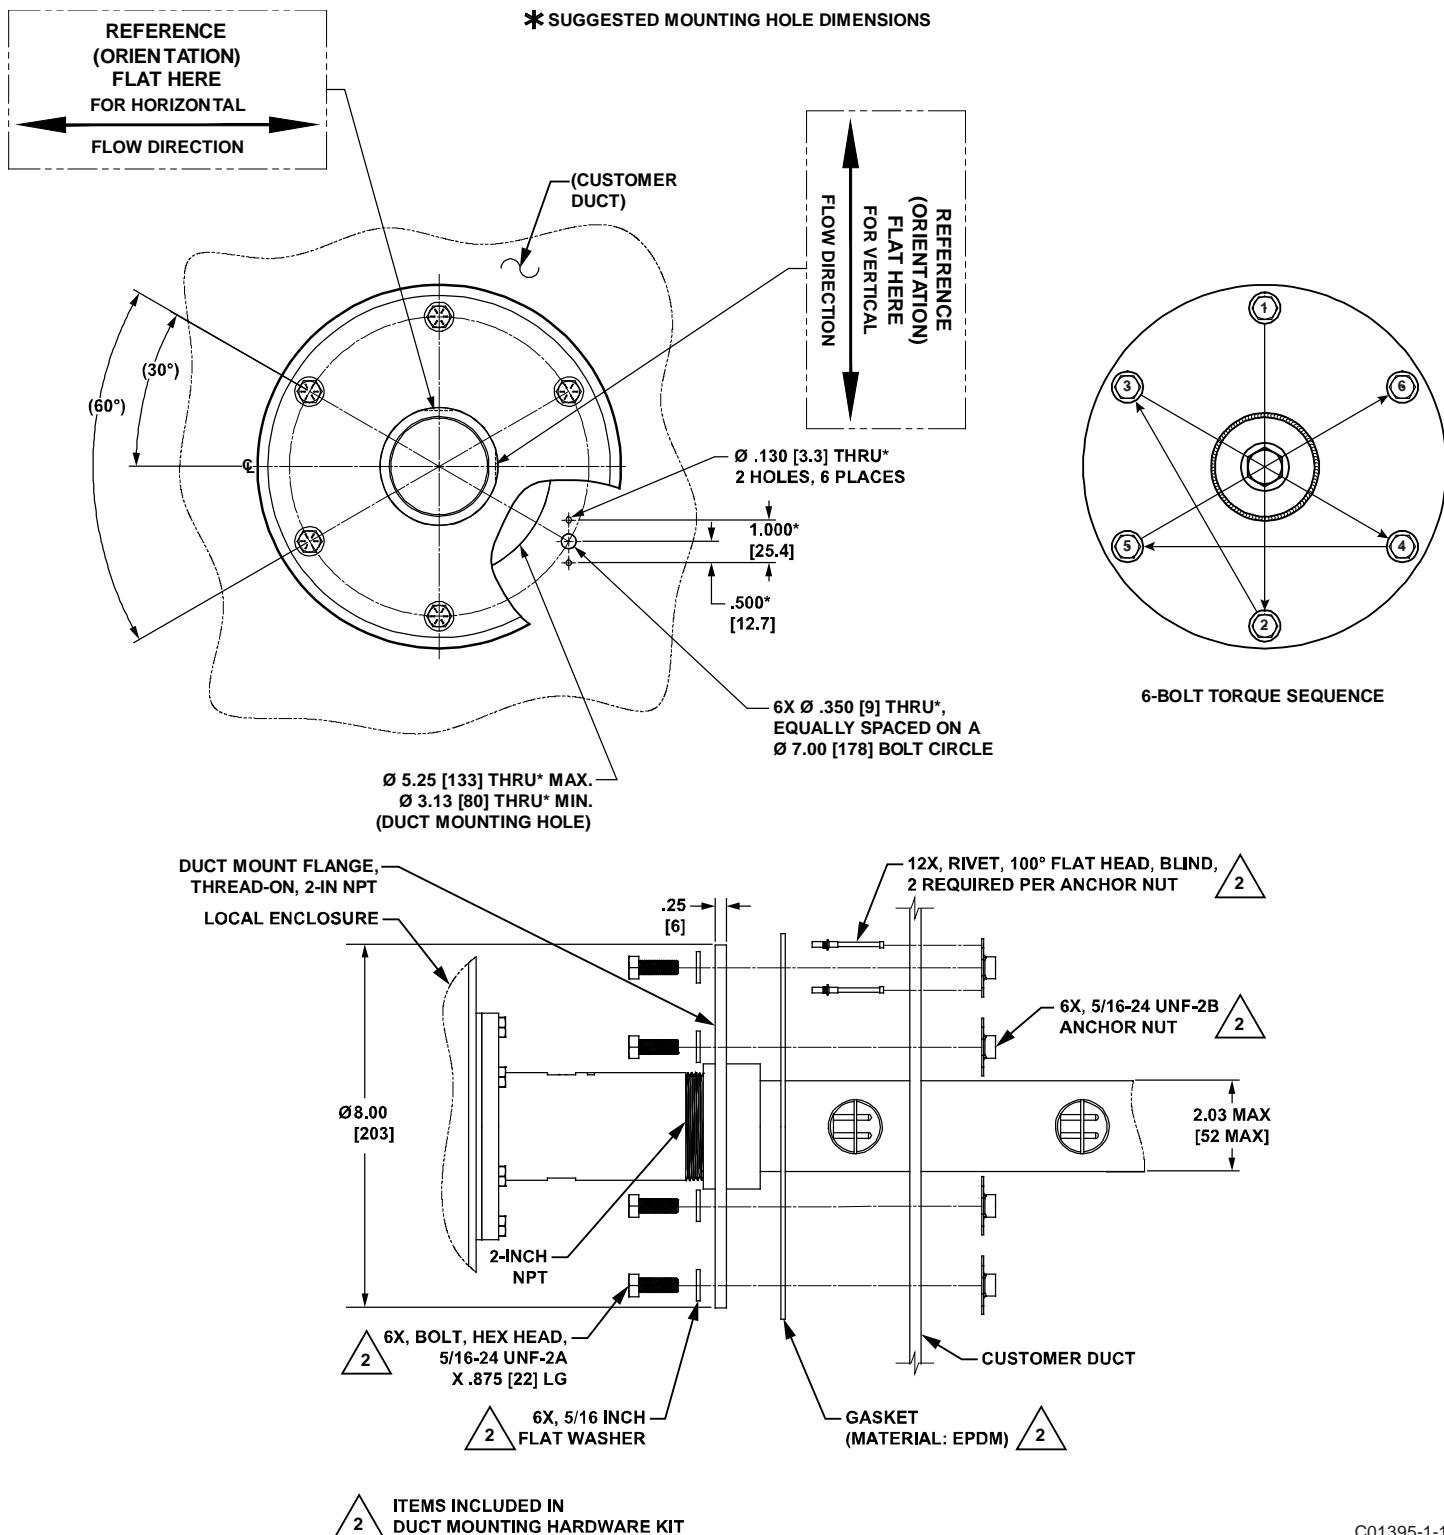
Duct Flange Mounting, Dimensions, and Mounting Hardware
